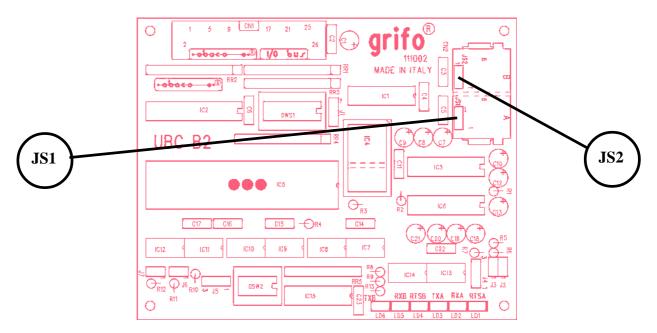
JUMPERS LOCATION (SOLDER SIDE)
